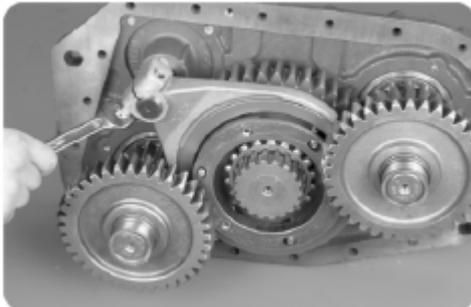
Exploded View of High/ Low Speed Gear Cylinder of Secondary Transmission
